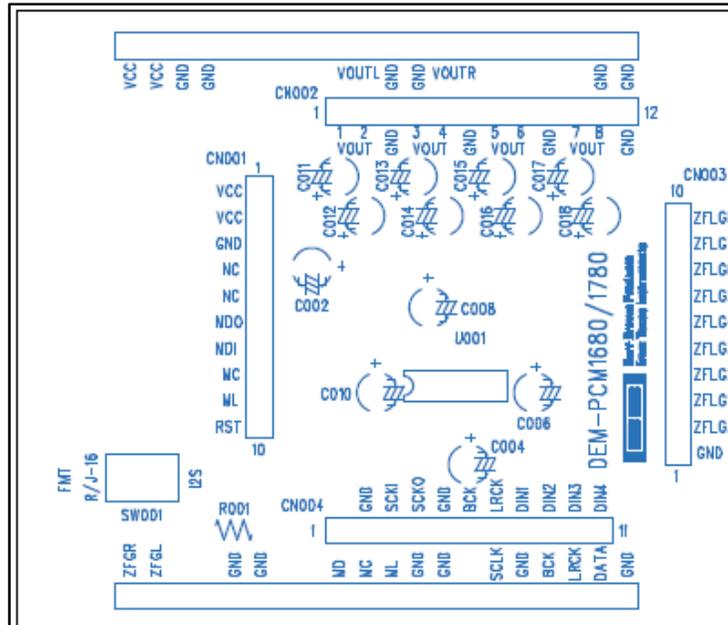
DEM-PCM1780/81/82 Board Layout—Silkscreen
